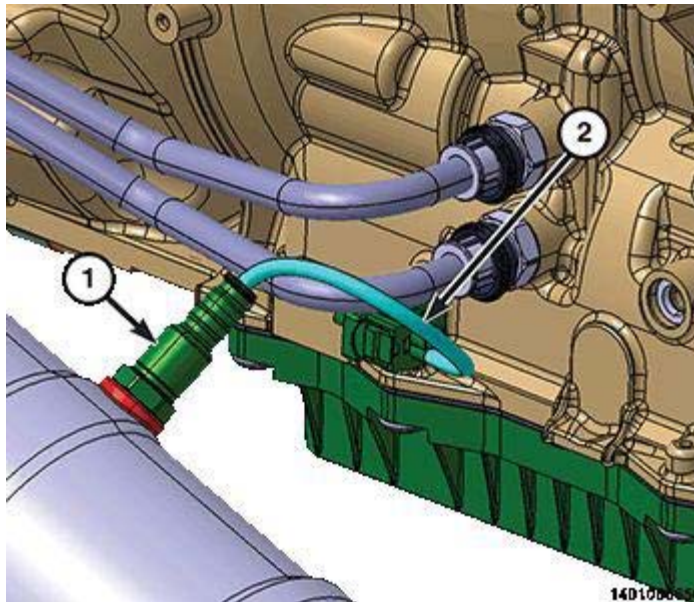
Oxygen Sensor & Oxygen Sensor Wire Harness Connector
